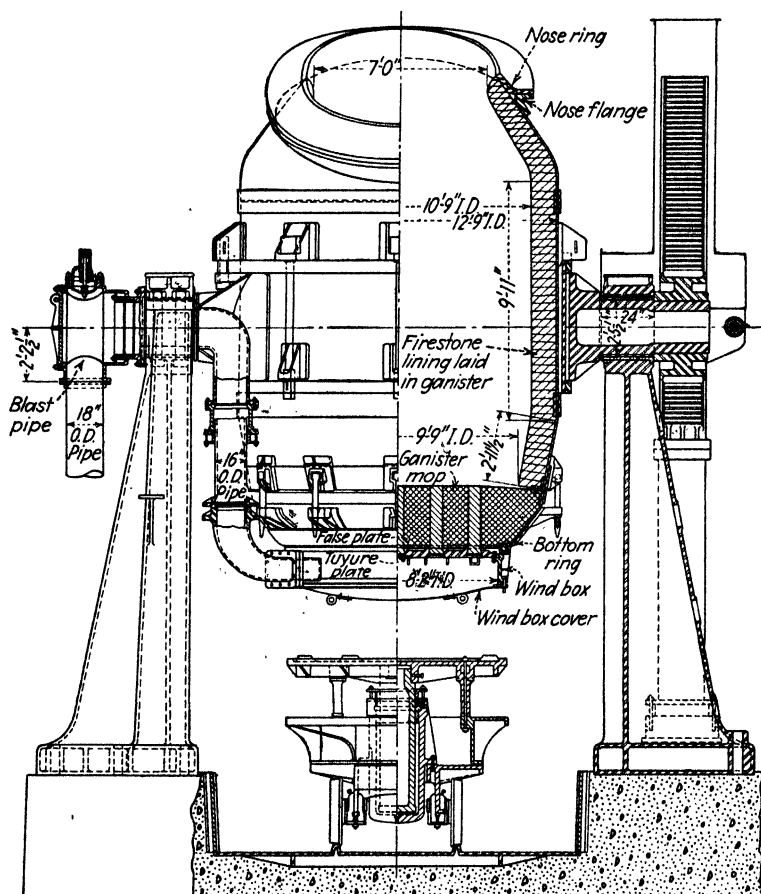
II.—Sectional elevation of an eccentric converter. (Courtesy of Jones & Laughlin Steel Corporation.)
